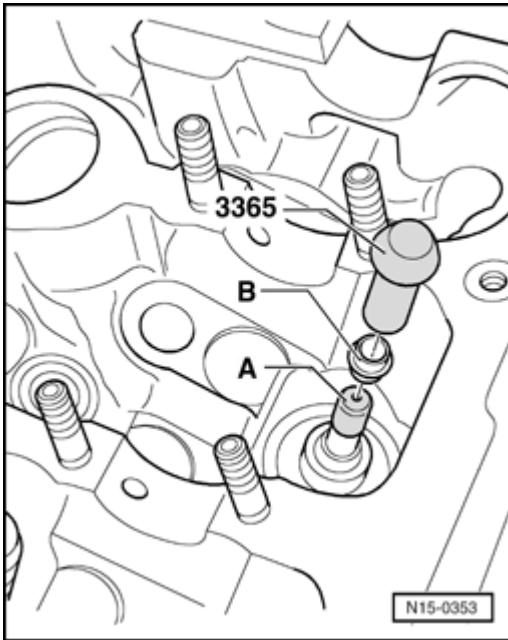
Identifying Plastic Sleeve, Valve Stem Seal And Valve Stem Seal Driver 3365
